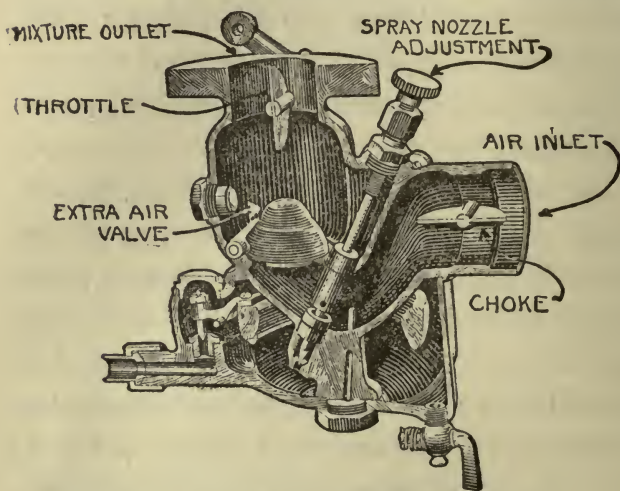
“KINGSTON” CARBURETOR, MODEL L
